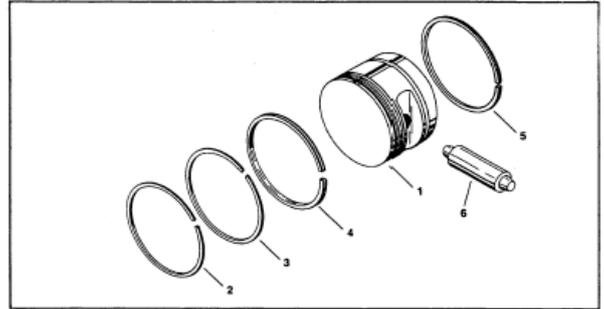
PISTON AND RING ASSEMBLY
